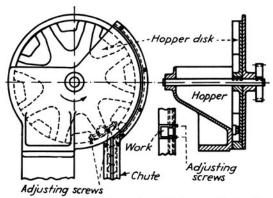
Vertical rotating disk hopper for feeding shouldered pieces to the chute. By adjusting the hardened dog-point screws, it is possible to feed pieces with a difference of only 0.010 in. on the diameter.
